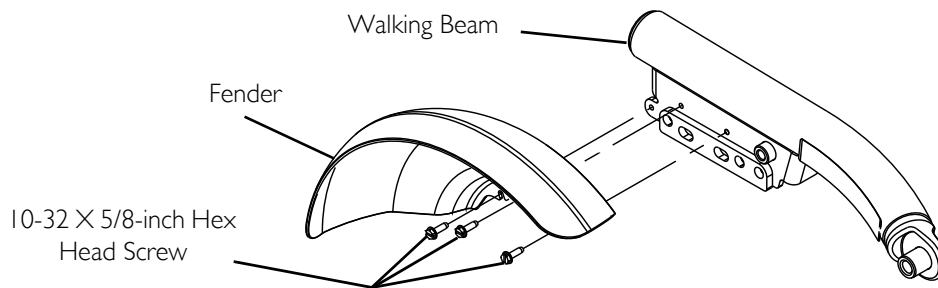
Removing/Installing the Fender Assembly from a 2-Pole and 4-Pole Motor
